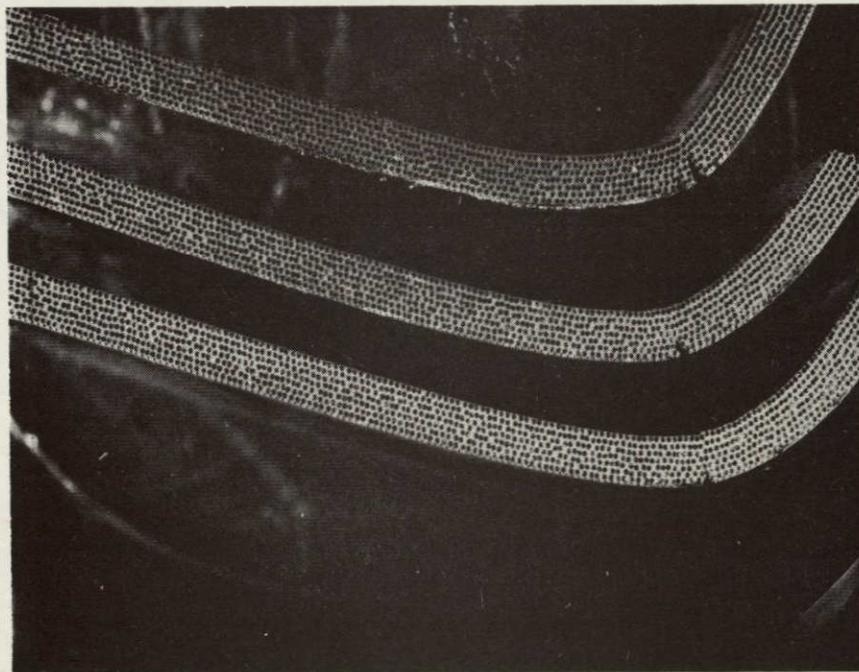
MACROSECTIONS OF CREEP FORMED C FRAME SHOWING EXTENT OF CRACKS
